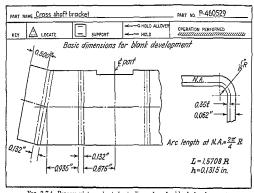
A. Process picture sheet; basic dimensions for blank development.
